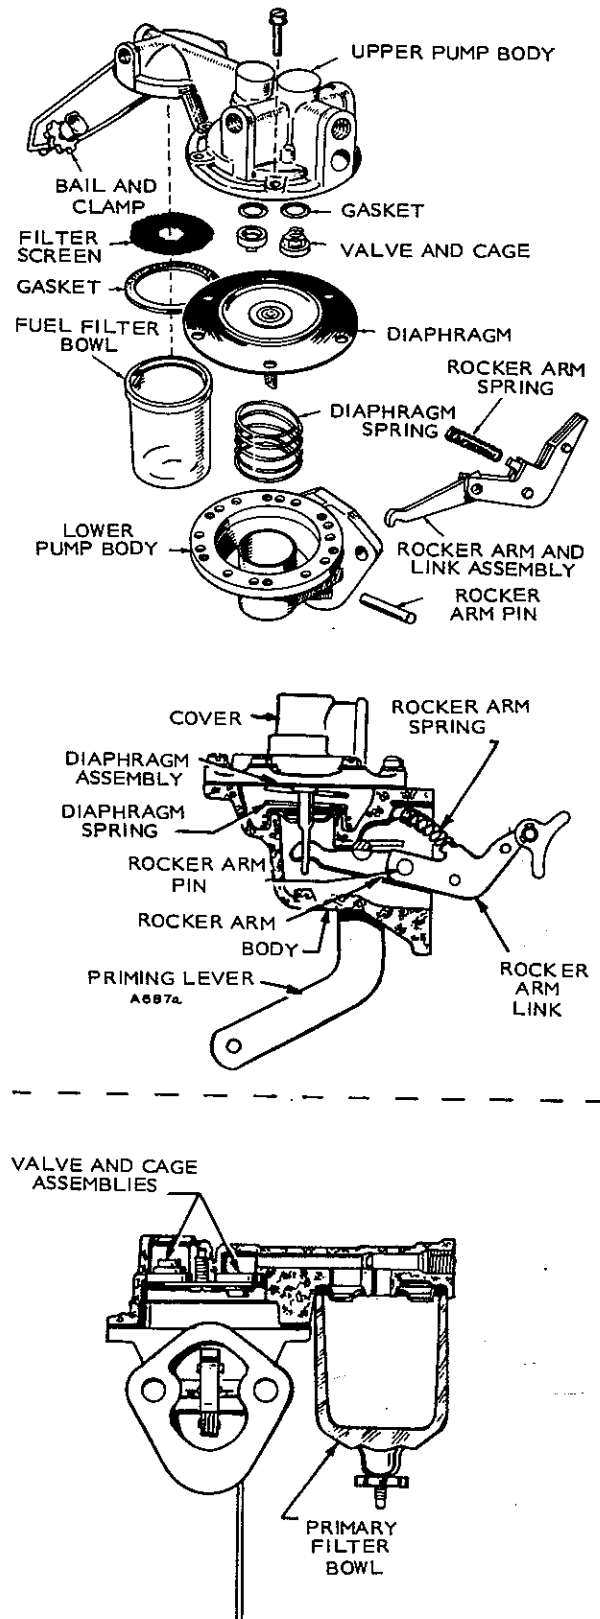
CCK SERIES MECHANICAL ACTUATED FUEL PUMP
